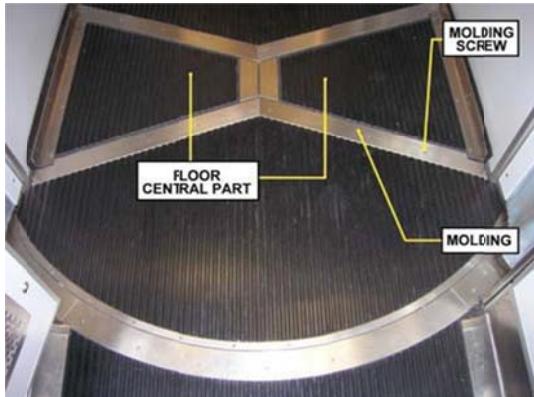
ART SECTION FLOOR - CENTRAL PART - REMOVAL/INSTALLATION
